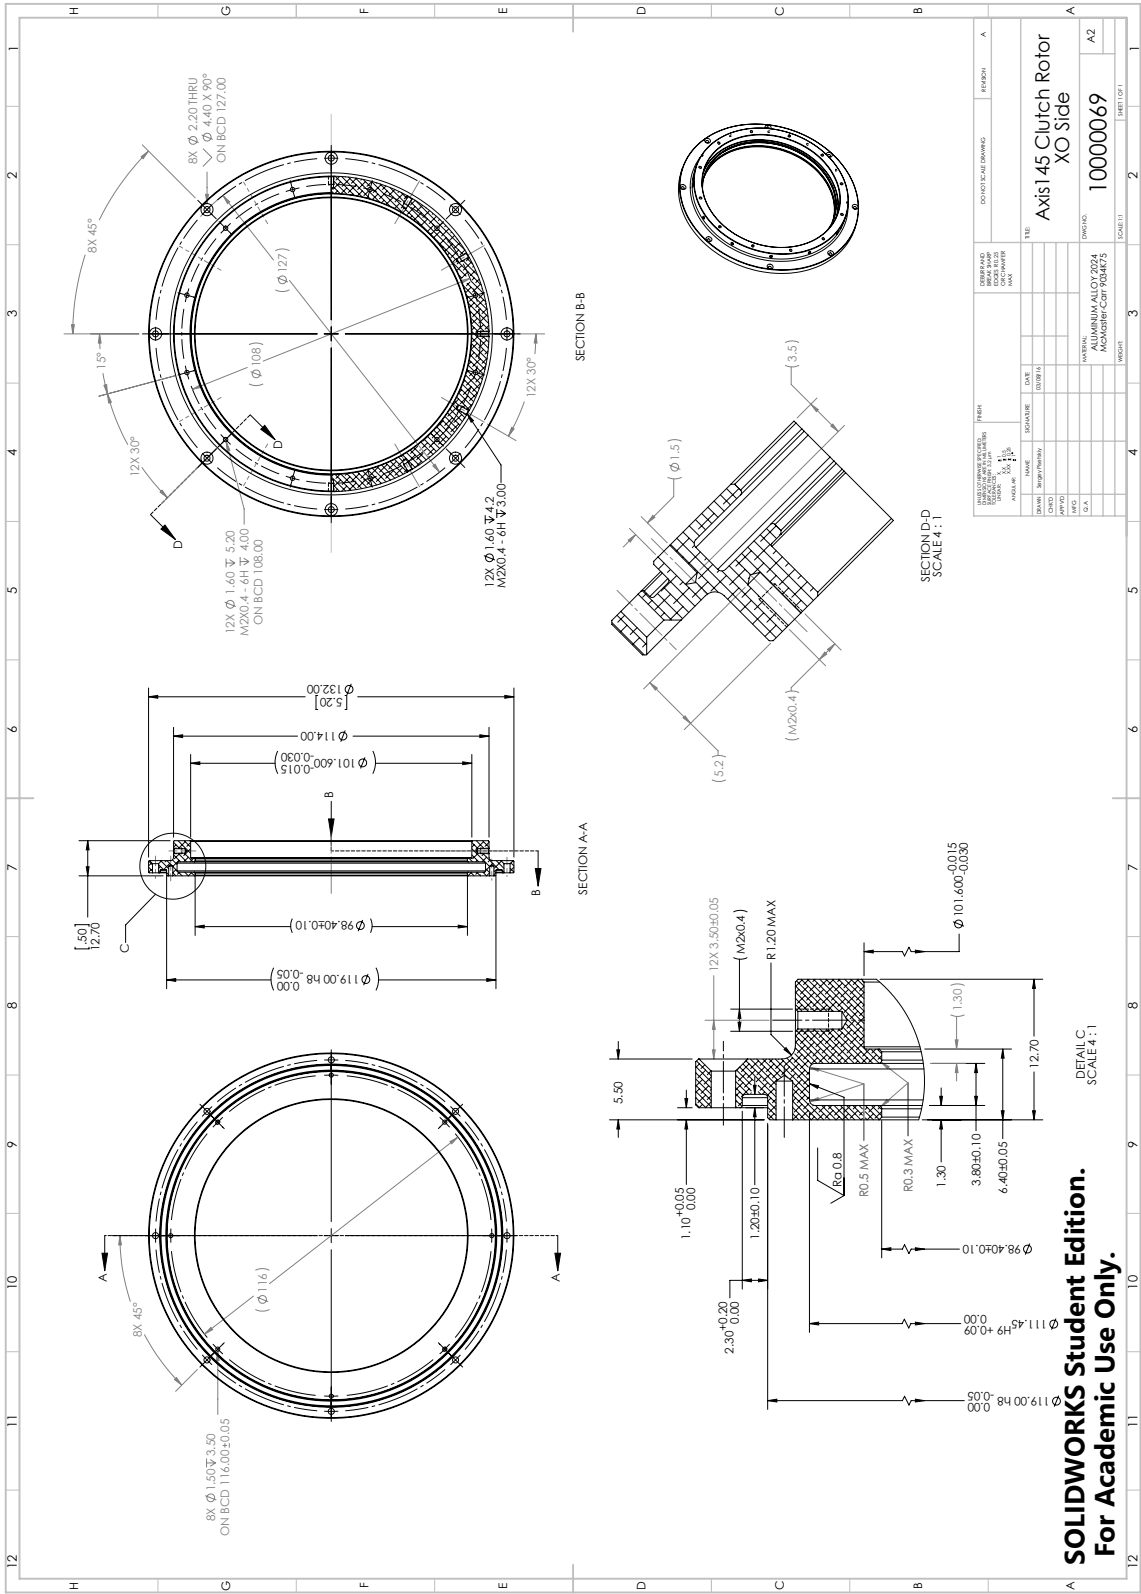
Drawing: Joint 1, 4, 5 clutch rotor side.
